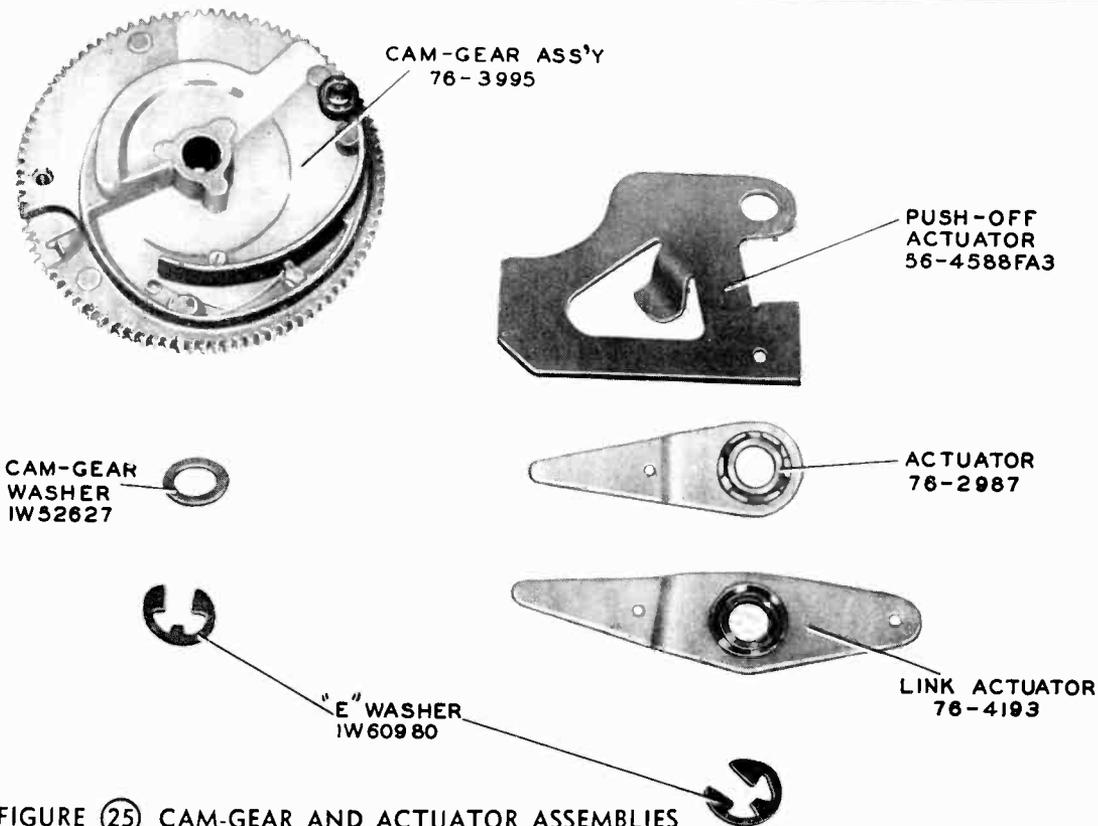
CAM-GEAR AND ACTUATOR ASSEMBLIES
